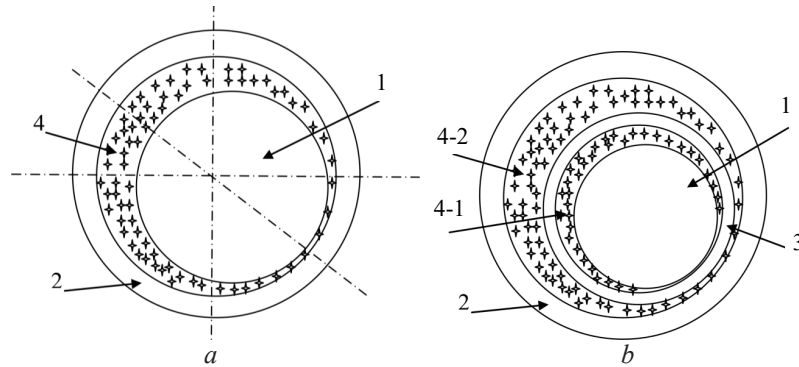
Model of hydrodynamic bearing: *a* – case of two solid bodies, *b* – case of three solid bodies: 1 – shaft; 2 – fixed bearing; 3 – hard floating ring; 4 – lubricating fluid film (4-1 – inner lubricating fluid film, 4-2 – outer lubricating fluid film)
